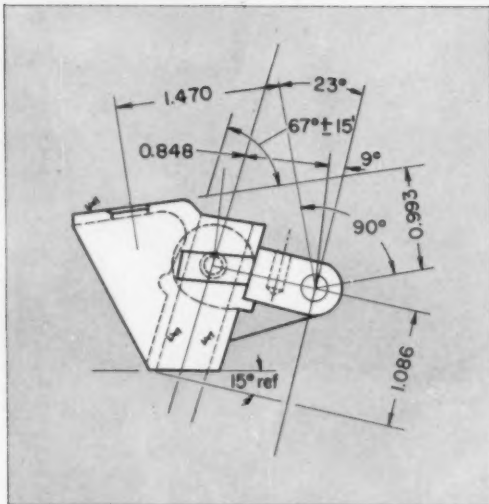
Original dimensioning of small casting created a difficult gaging problem and complicated machining owing to tolerance build-up.
